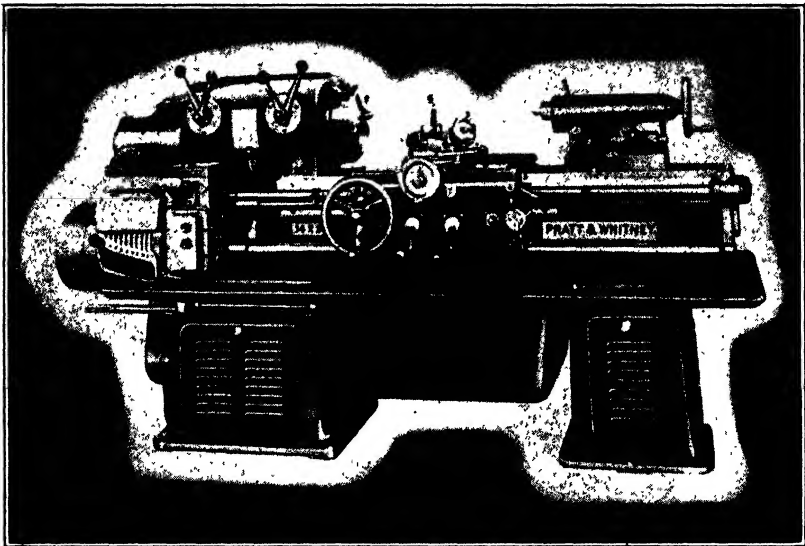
Engine lathe. (Courtesy Pratt & Whitney.)
